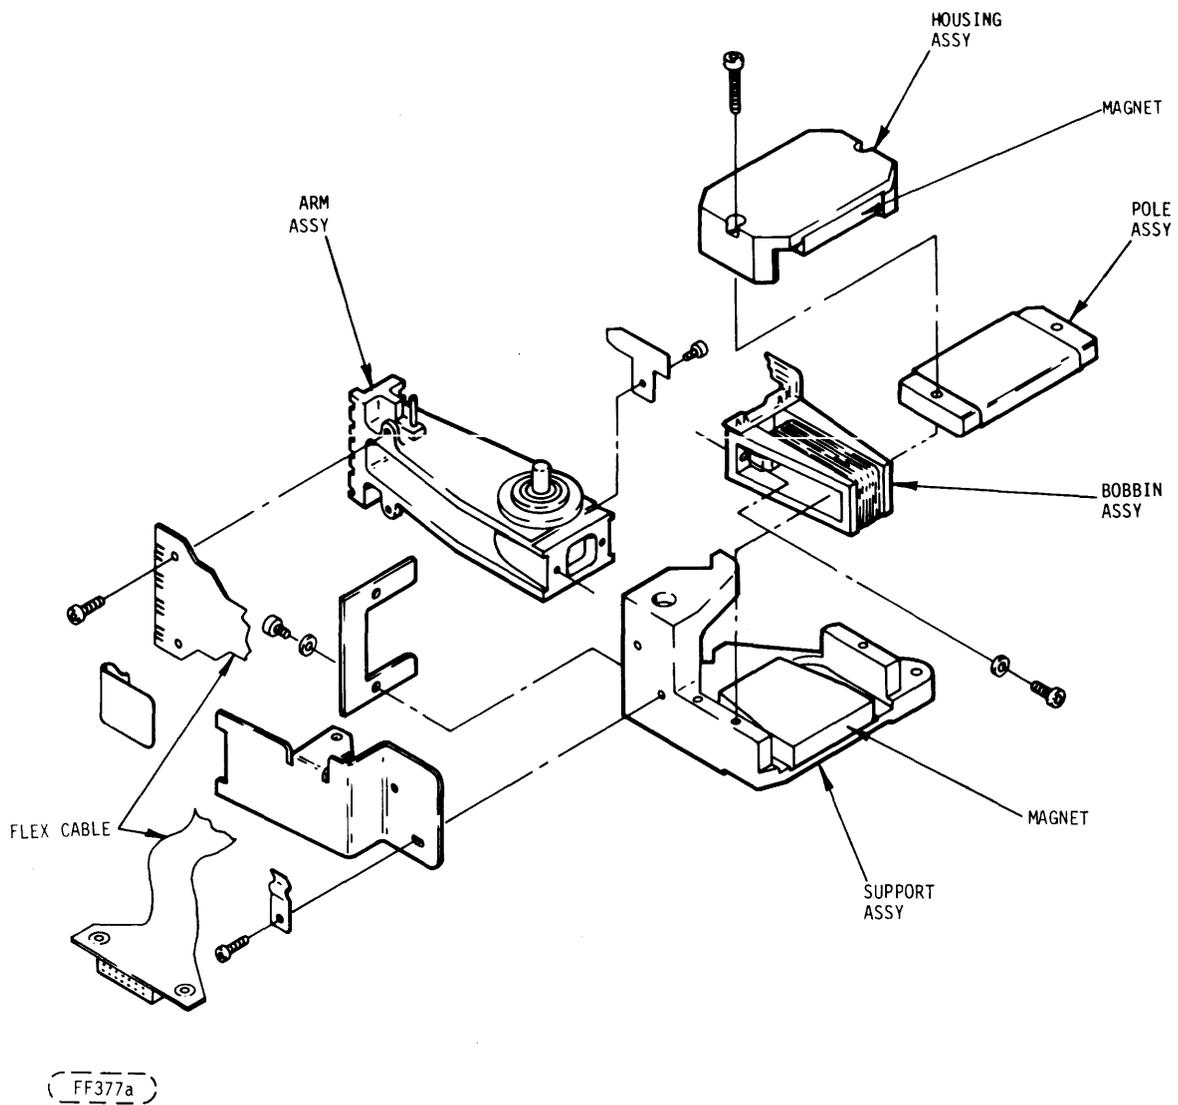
WREN ACTUATOR ASSEMBLY
